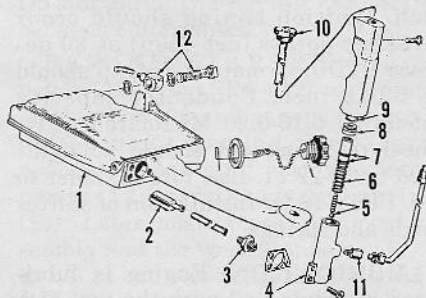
Exploded view of the chain oiler reservoir, manual pump and associated parts. Outlet screen and fitting (12) are for automatic chain oiler on models so equipped.
